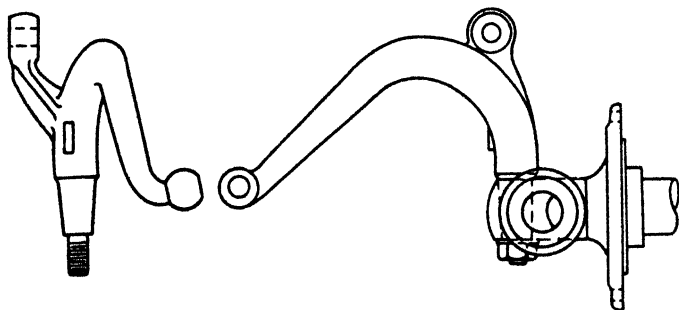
DOUBLE KNUCKLE ARM SECURED BY TAPERED JOINT WITH KEY.
